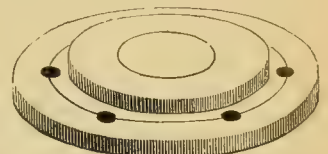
CYLINDER BOTTOM FINISHED—INSIDE.
